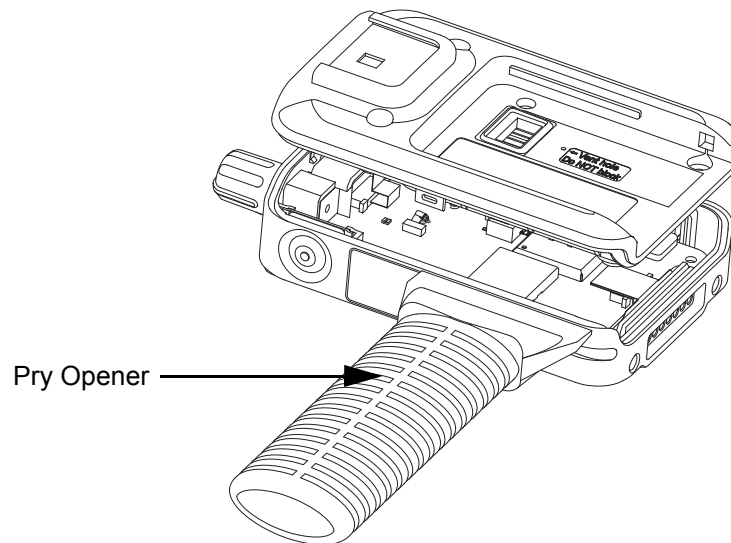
Separate Back Housing Assembly from Front Housing Assembly
